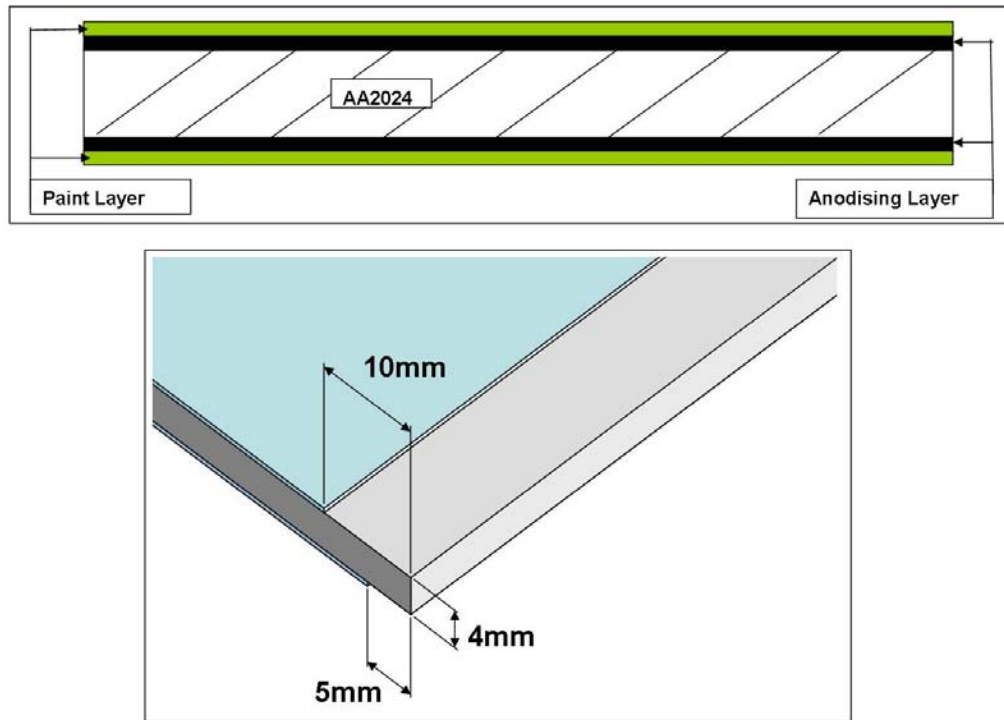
Diagram of layers samples used for Friction Stir Welding samples and the area of preparation.
